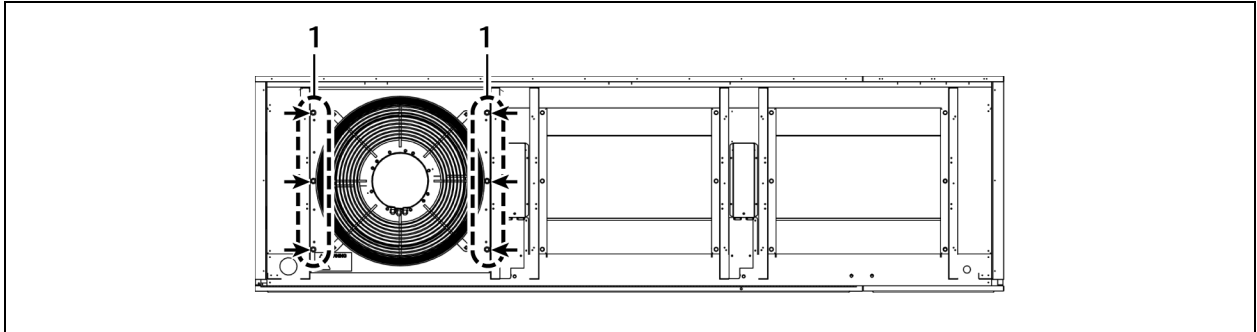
EC Fan mounting Hole Alignment for 73 in. and 85 in. Units
